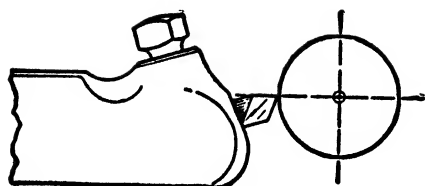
For cutting screw threads, set the top of the cutter bit in line with the center. (South Bend Lathe Works)
